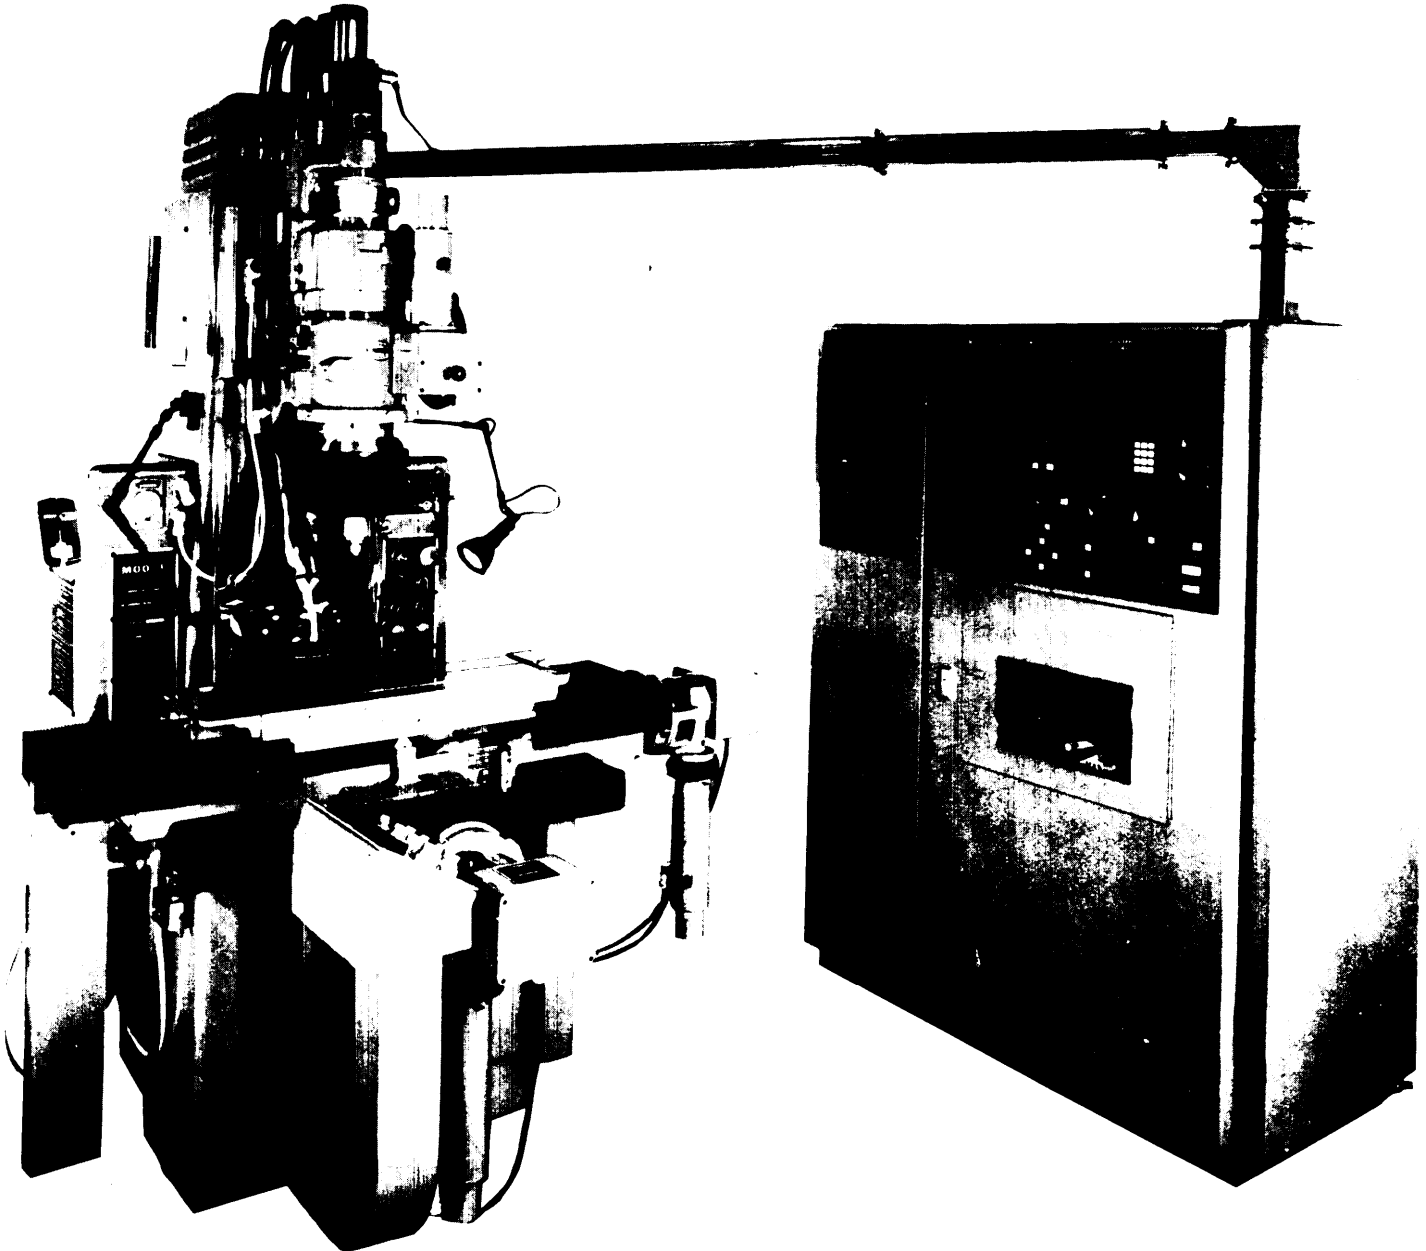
Three-axis, jig grinding machine. (Moore Special Tool Company)
